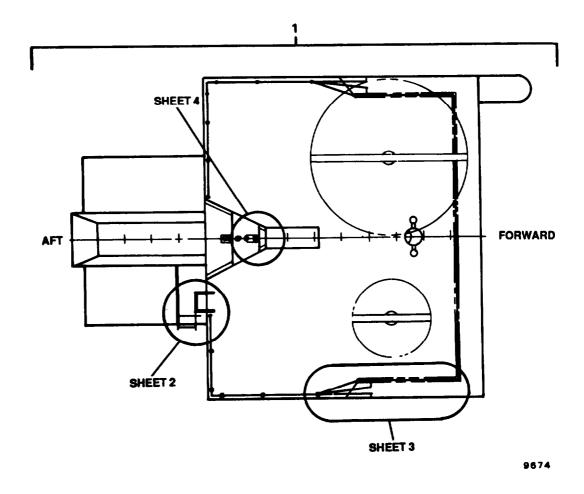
Pilothouse Top Ladders and Handrails (Sheet 1 of 4).
